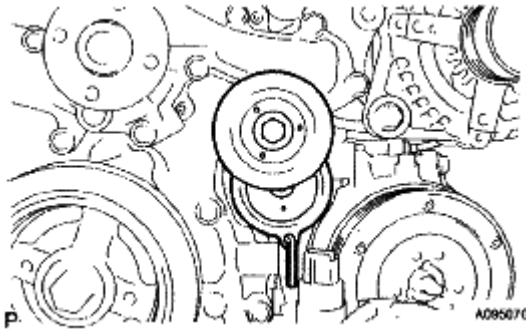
Identifying Bi-Hexagon Wrench Into Holes To Fix V-Ribbed Belt Tensioner
